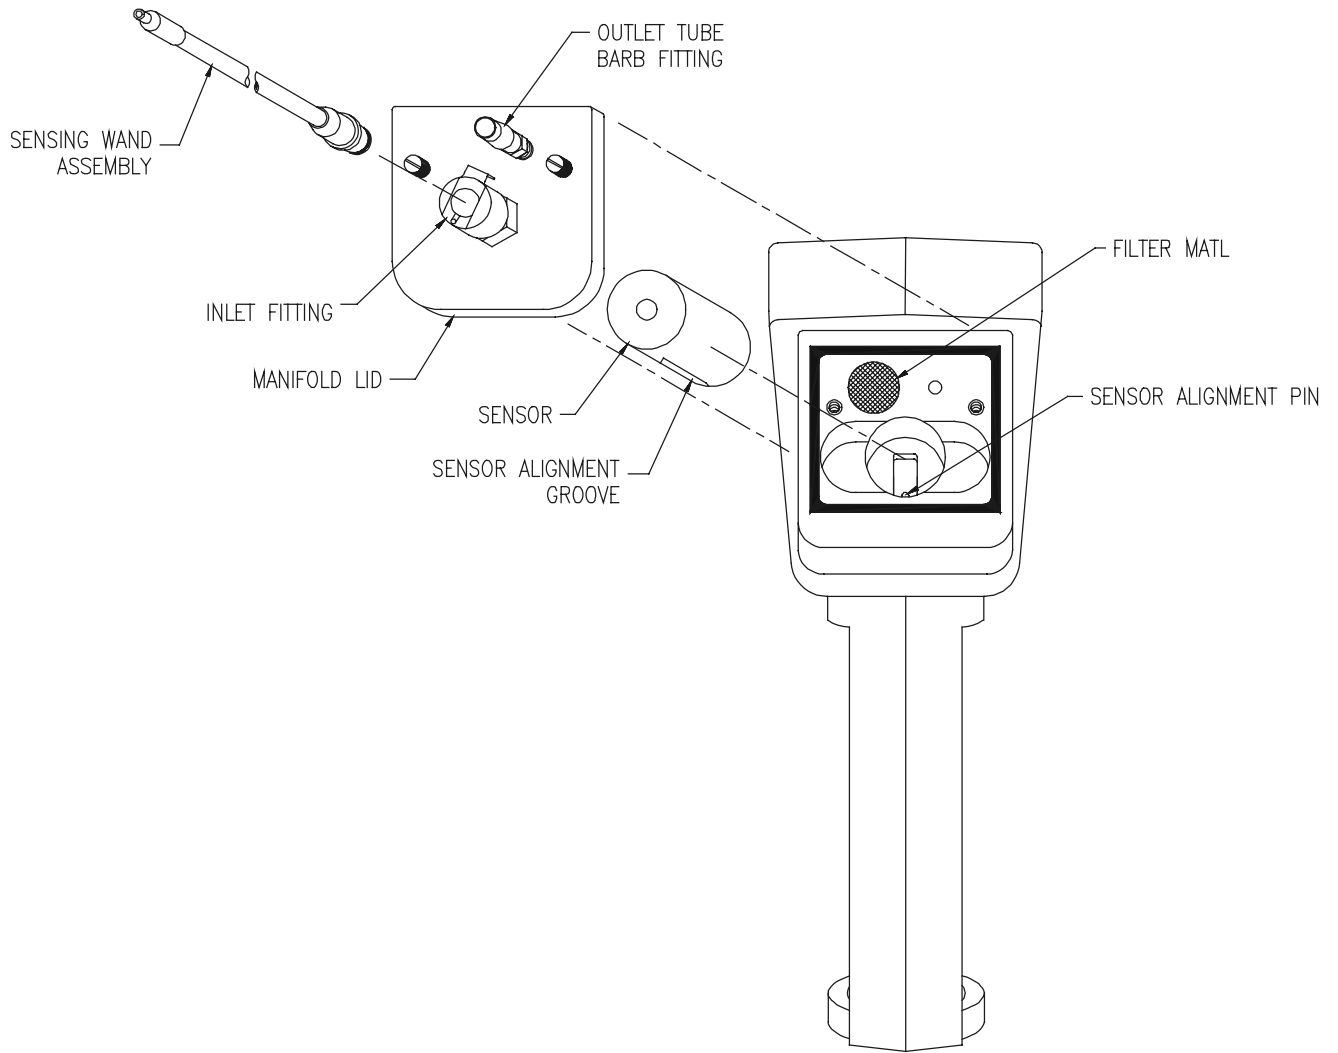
MANIFOLD ASSEMBLY EXPLODED VIEW (ATI-0403)
